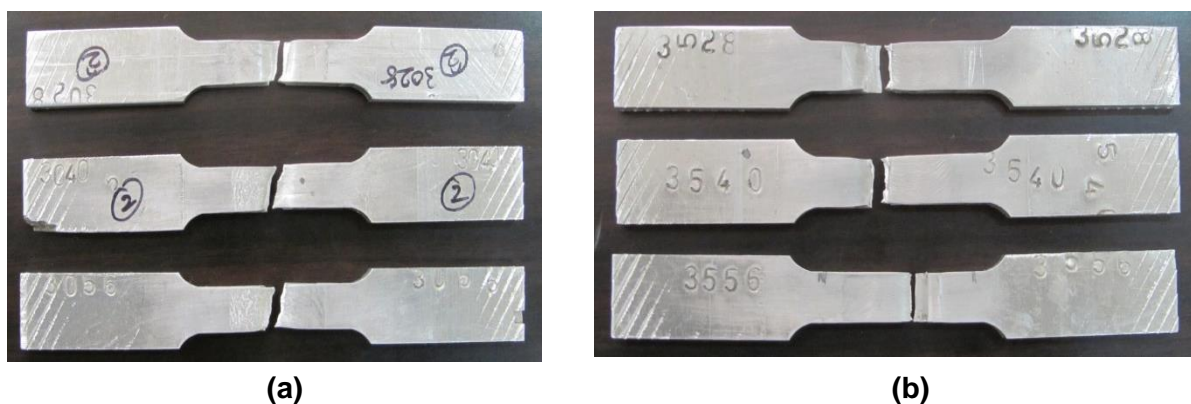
Post UTM test specimen of FSW joints for different values of TS, *mm/min* (TS=28; 40; 56); (a) TPH=3.0 mm (b) TPH=3.5 mm.
